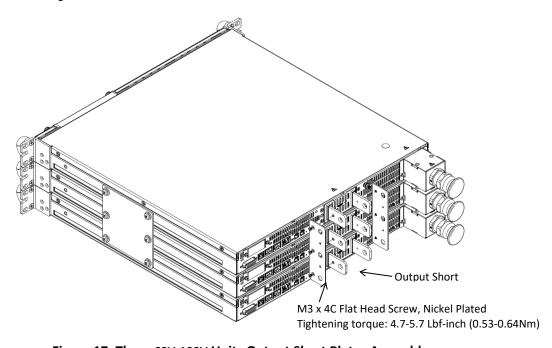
Three 60V-100V Units Output Short Plates Assembly
